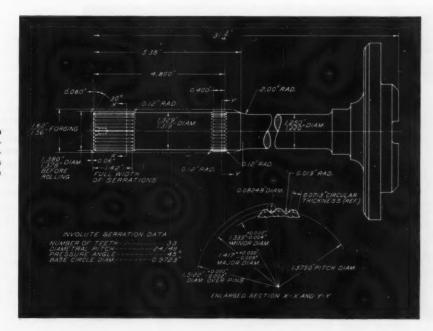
Two serrations on this hardened steel rearaxle shaft are cold rollformed in one continuous operation with set-up seen in Fig. 2.
